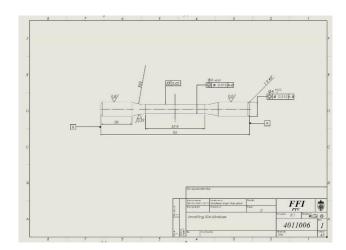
Drawing for specimen ISO 1143-210 standard
